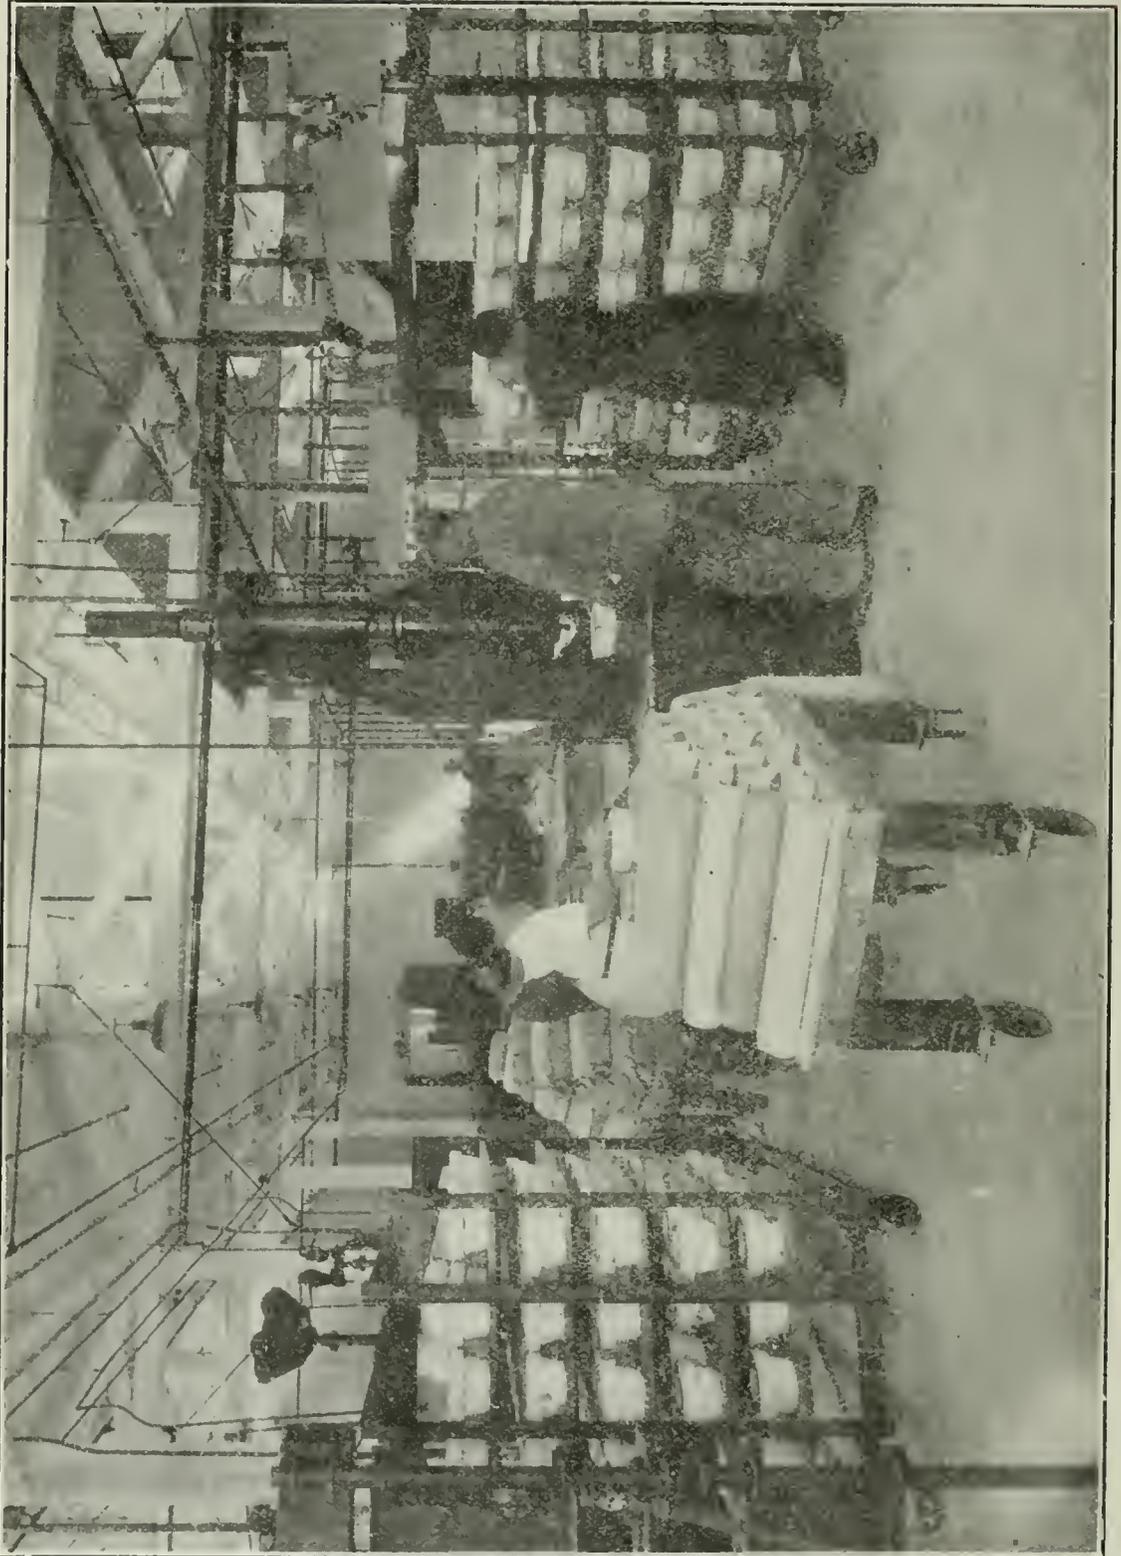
Hot-Pressing Room. Westinghouse Electric and Manufacturing Co., Emeryville, Alameda County.
